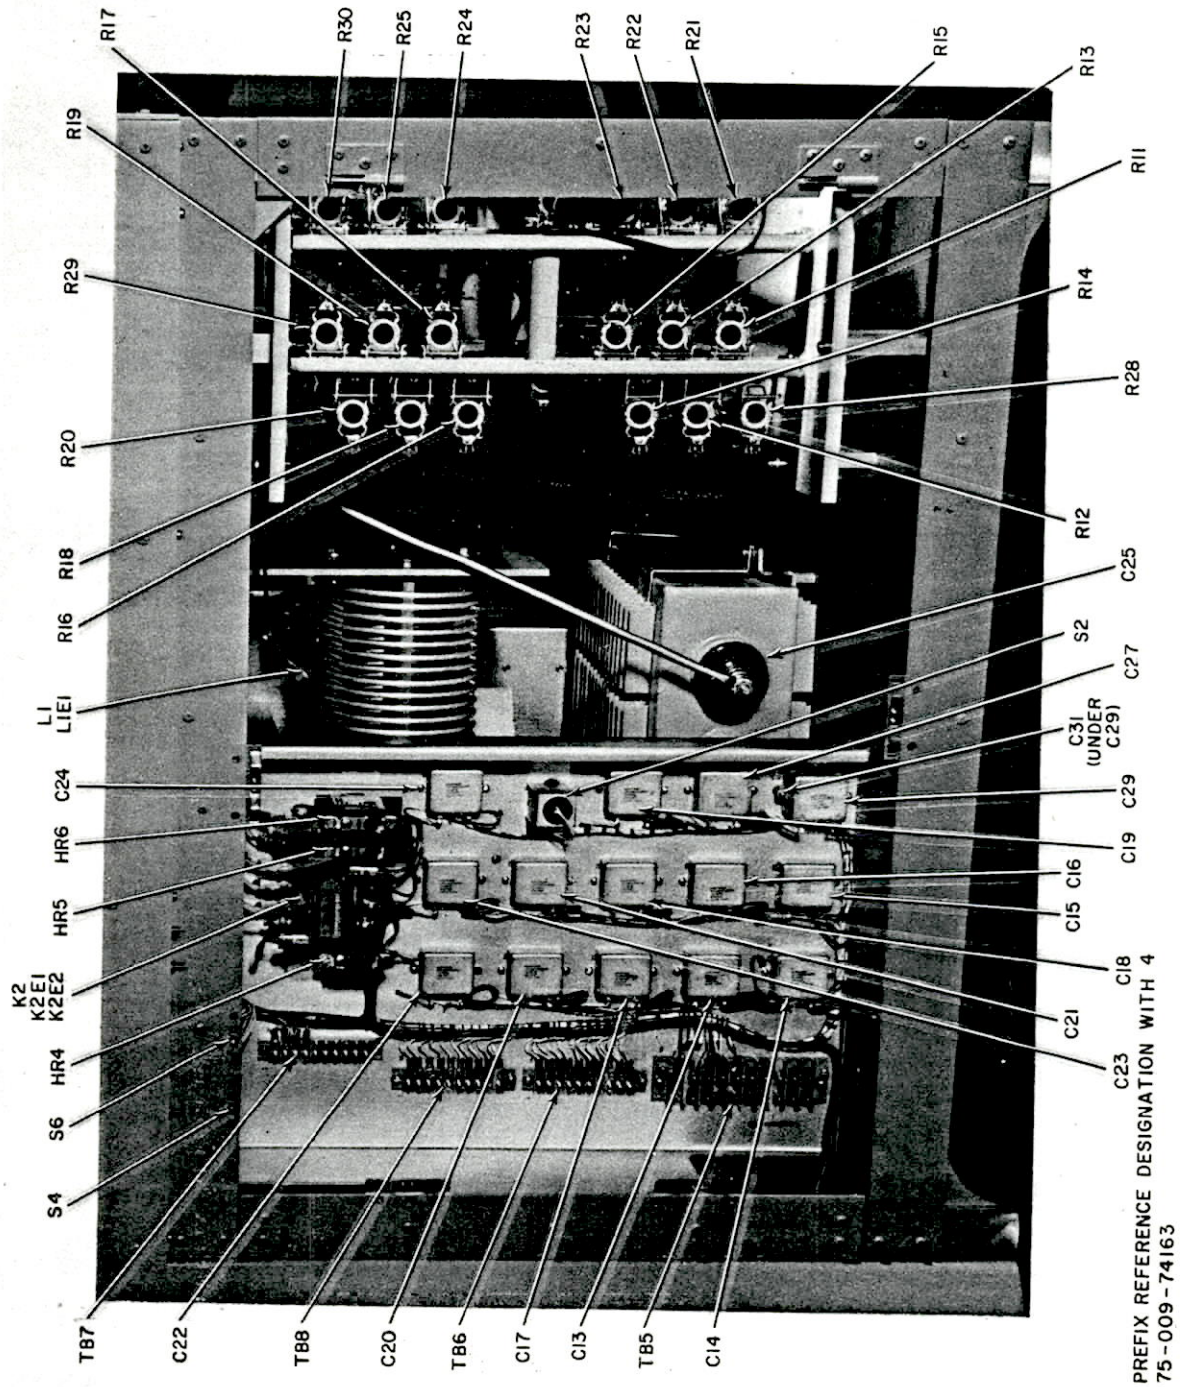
Dummy Load Electrical DA-329A/FPN-44, Right Side View, Parts Location Diagram
